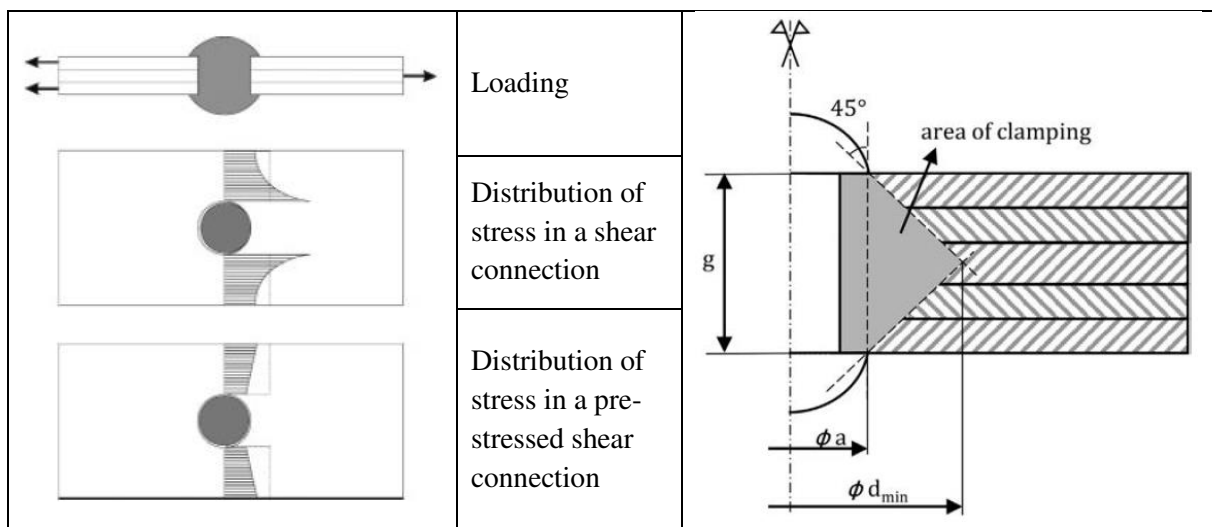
Left: Stress distribution close to a rivet in riveted joint [31]. Right: definition of clamping area in riveted joint, where g ... is grip length, a ... is diameter of rivet head [47]
